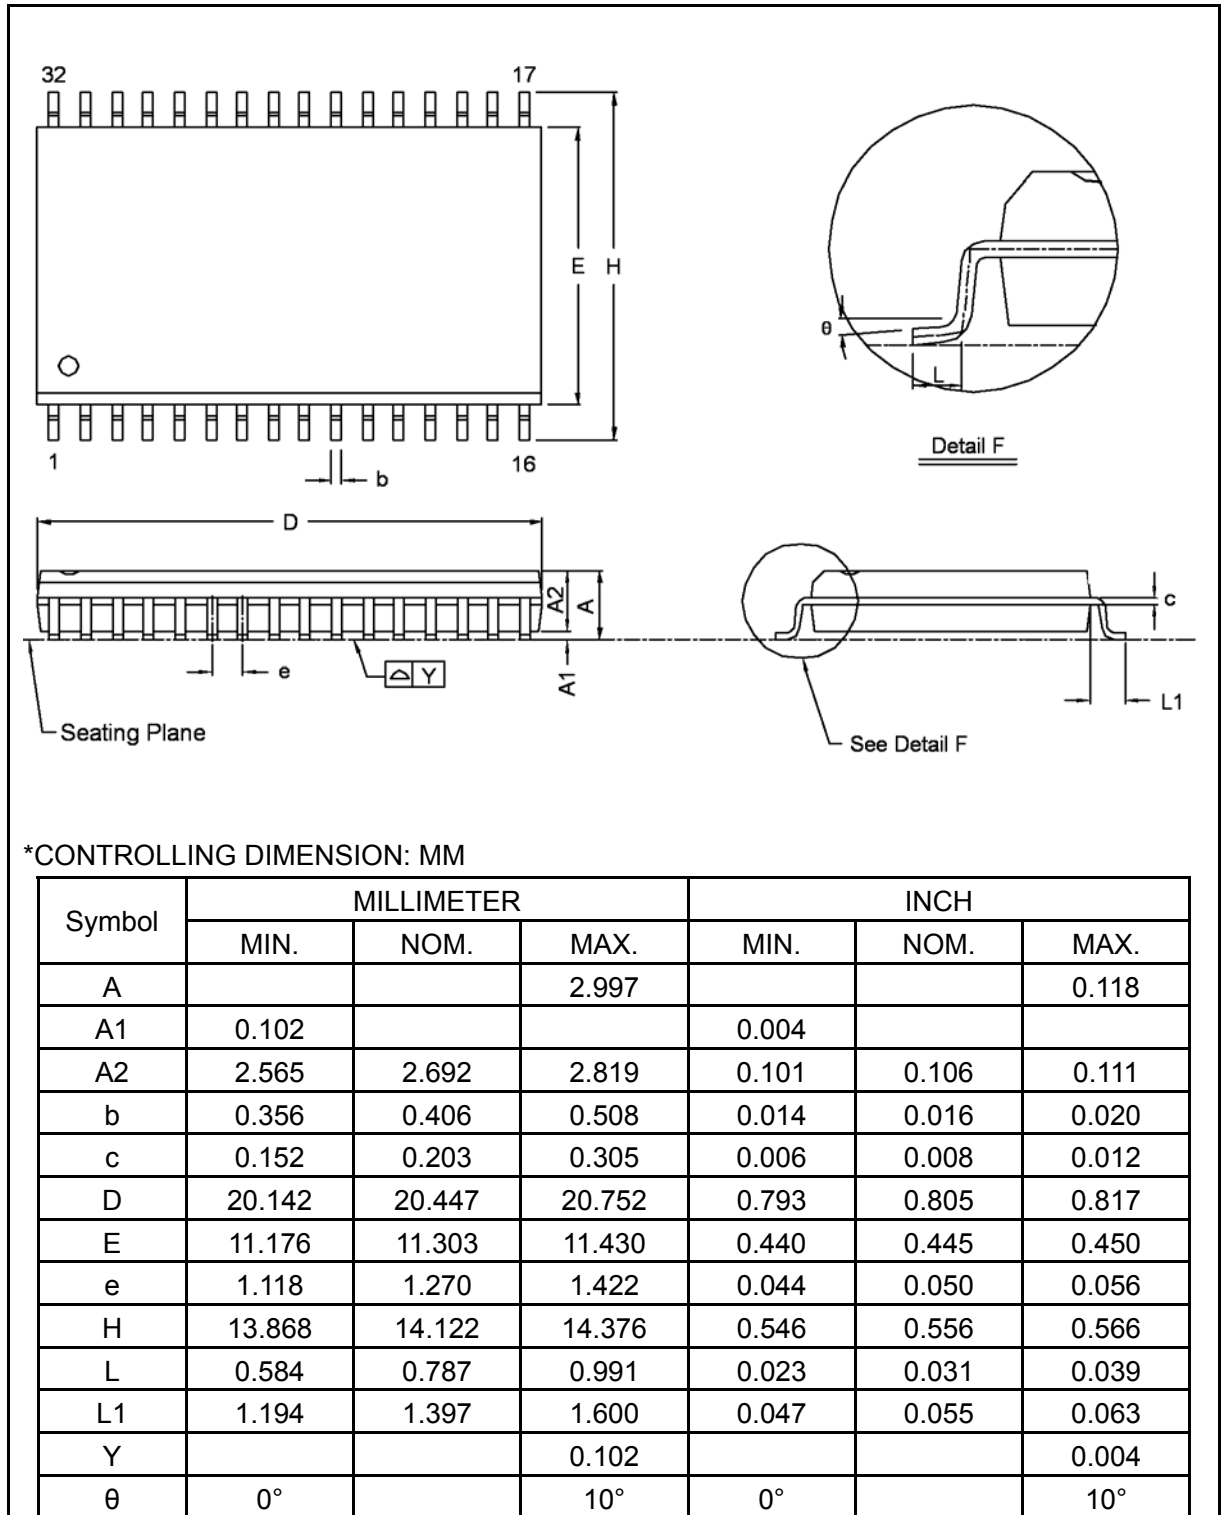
FM17XX 32-Pin SOP Package Dimensions
